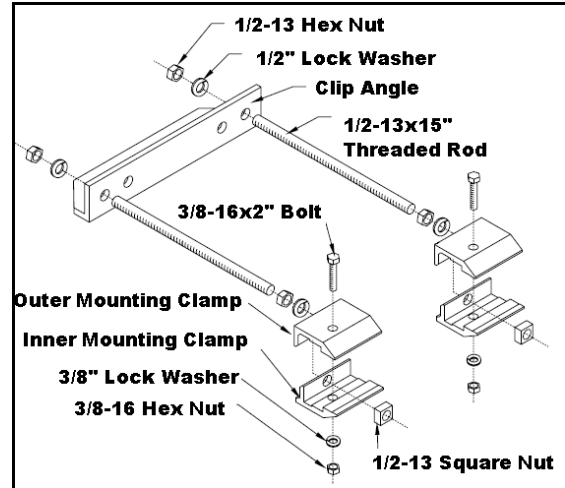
I-Beam Clamp Mounting Method, Front Rotated View
